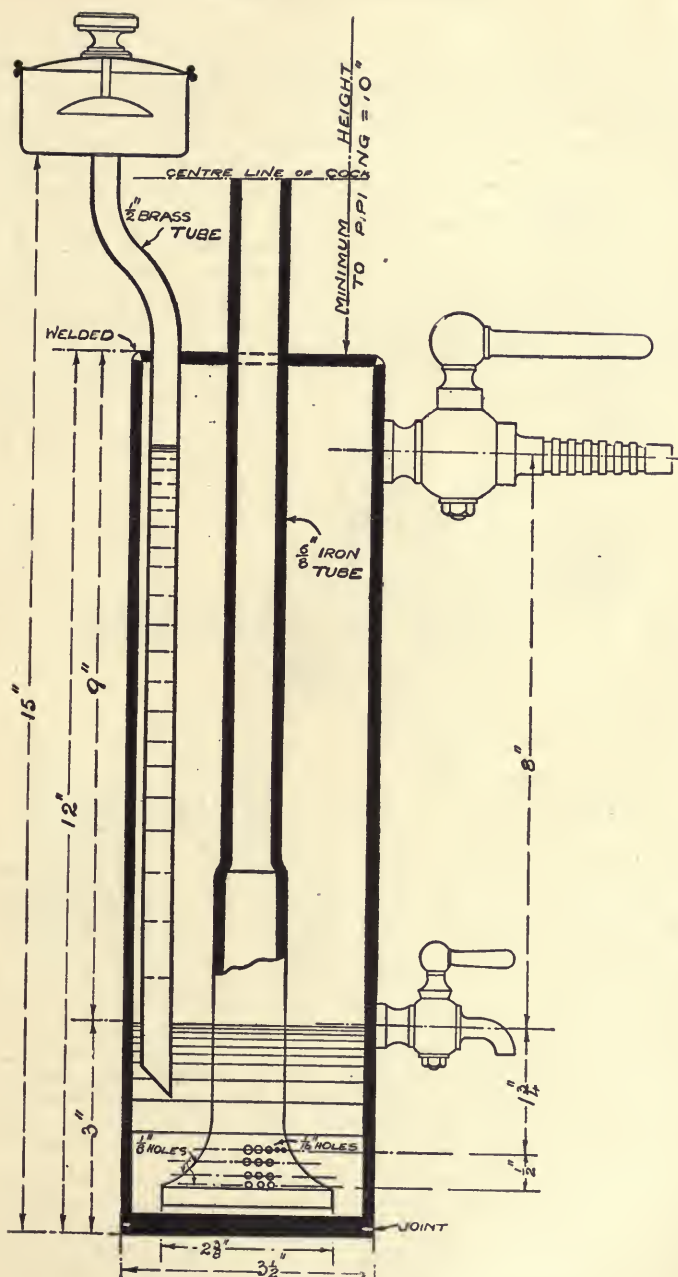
Union de la Soudure Autogène* design of hydraulic valve.
